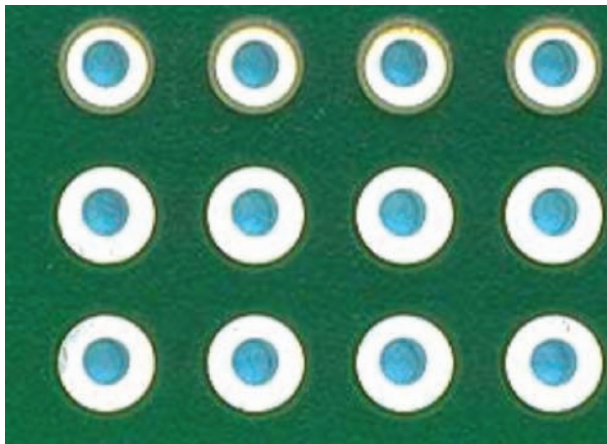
Example of copper-defined pads and solder mask-defined pads on the surface of a printed circuit board. The solder mask-defined pads are shown on the top row.
